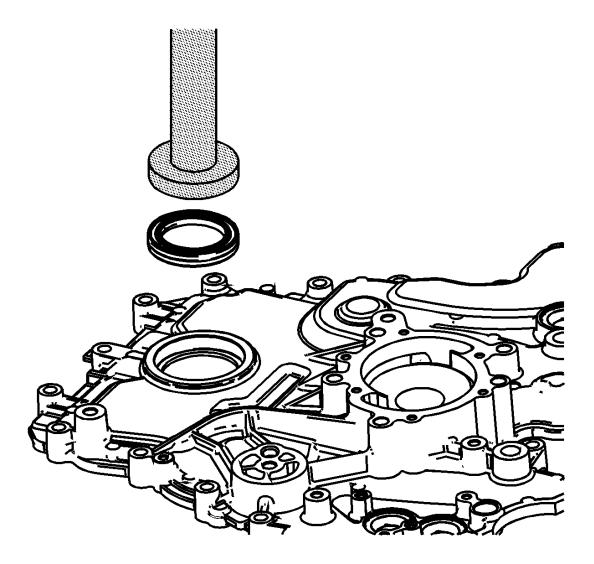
View of Crankshaft Front Oil Seal Assembly Courtesy of GENERAL MOTORS COMPANY
